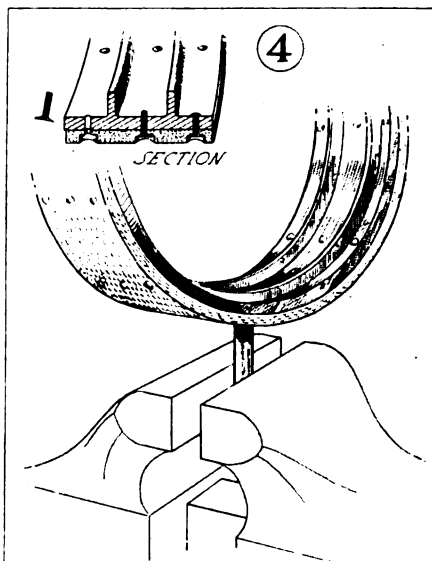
A piece of drill rod held in the vise serves as an anvil to hold the heads of the rivets while forming the other ends
